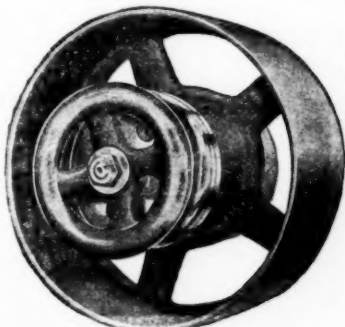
FRICTION CLUTCH FOR GAS ENGINES.
